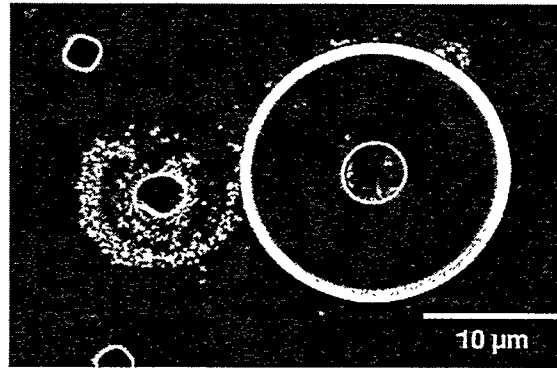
SEM image of receiver hole in drive gear exhibiting severe wear.
